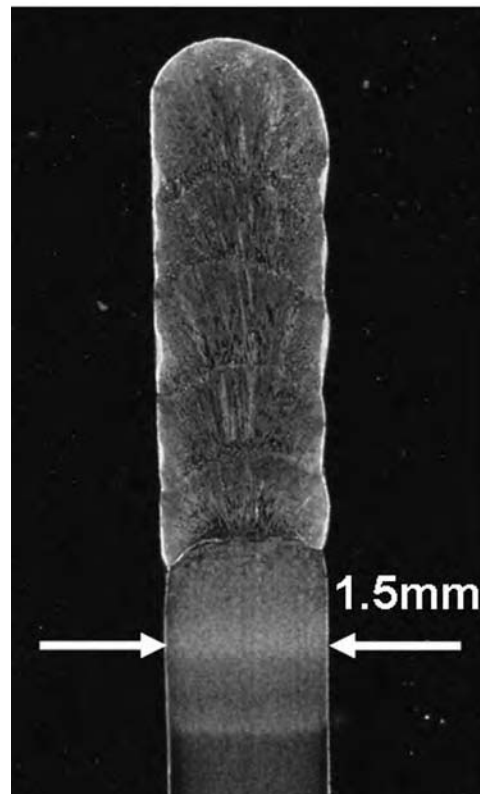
Reciprocating wire feeding gas metal arc welding can produce precise deposits, such as this edge buildup on stainless steel. Courtesy of Edison Welding Institute
